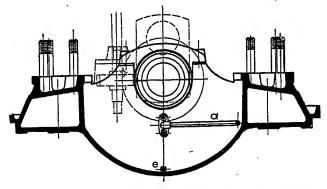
Cross-section of Bed Plate for Single-cylinder Engine.
